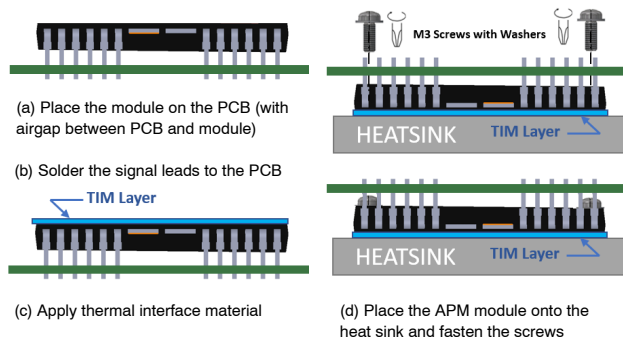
Process Flow of Soldering APM Package (When PCB Mounting First)
